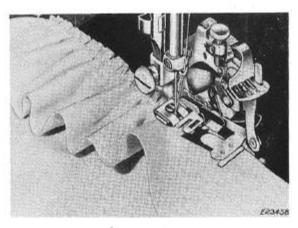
Making a Ruffle and Attaching it in One Operation.
